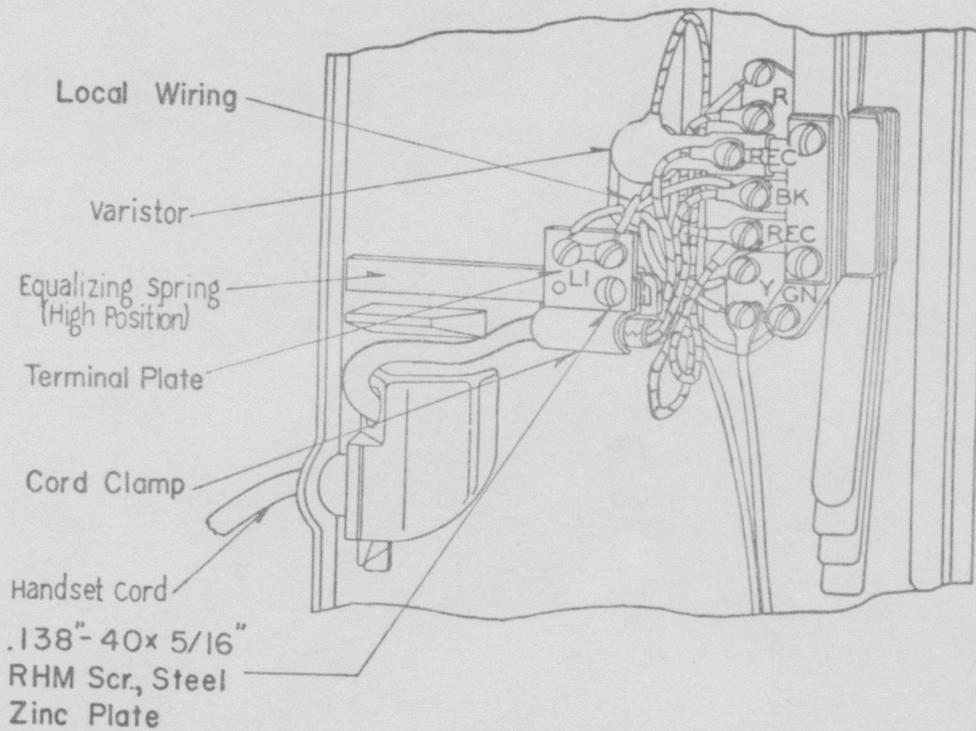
176 or 178-type Coin Collector—Backplate Assembly
